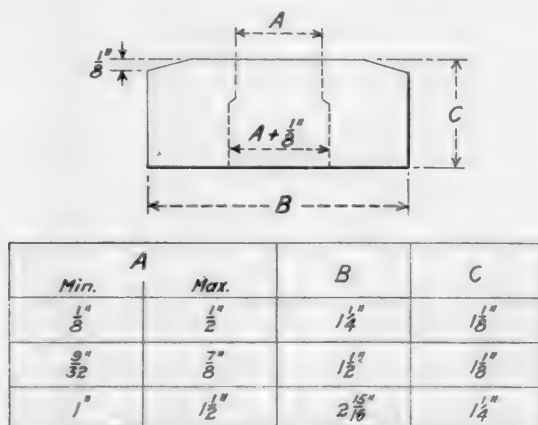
Boiler Punch Dies Reduced to Three Sizes
